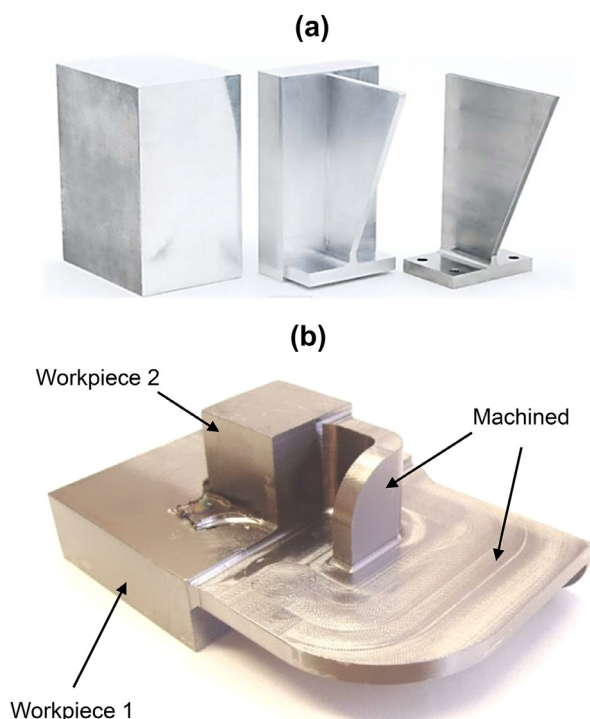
(a) An aerospace component machined from an oversized block of metal (image courtesy of TWI [25]), and (b) A Ti-6Al-4V preform fabricated using the LFW process – the as-welded structure can be seen on the left side of the figure and the final machined component on the right (image courtesy of TWI [1]).
